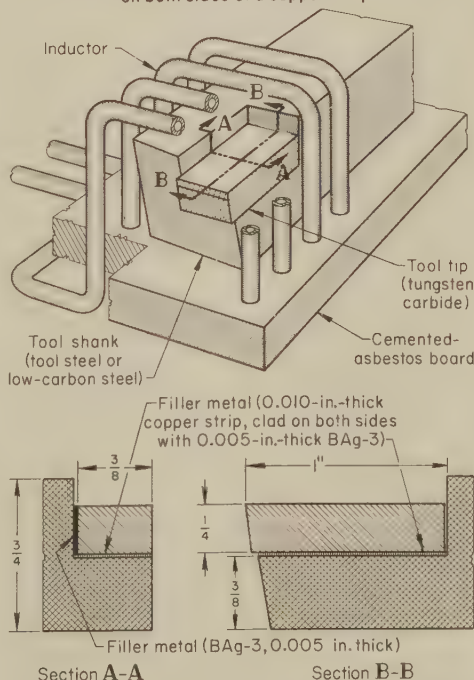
Induction brazing of a carbide tip to a steel tool shank, using a filler-metal "sandwich" to prevent shear-stress cracking of the carbide (Example 590)
